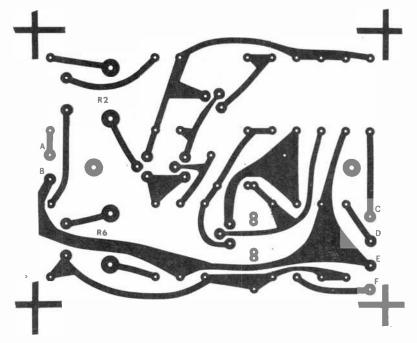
Actual size printed circuit foil pattern. The marks at the corners are for board dimensions. The two mounting holes are shown along the center line.
